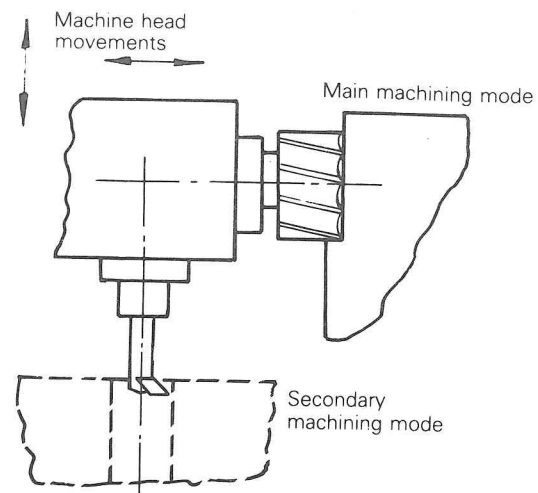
Example of additional machining facilities on a horizontal machining center.
